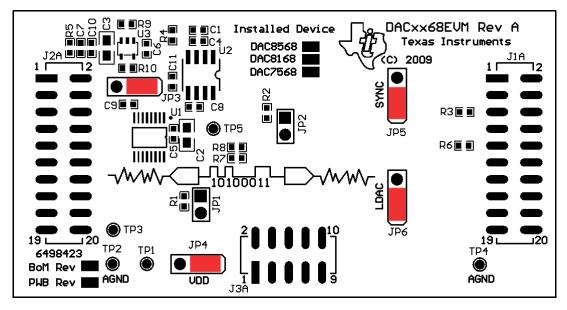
Top Layer Assembly Drawing and Jumper Locations
